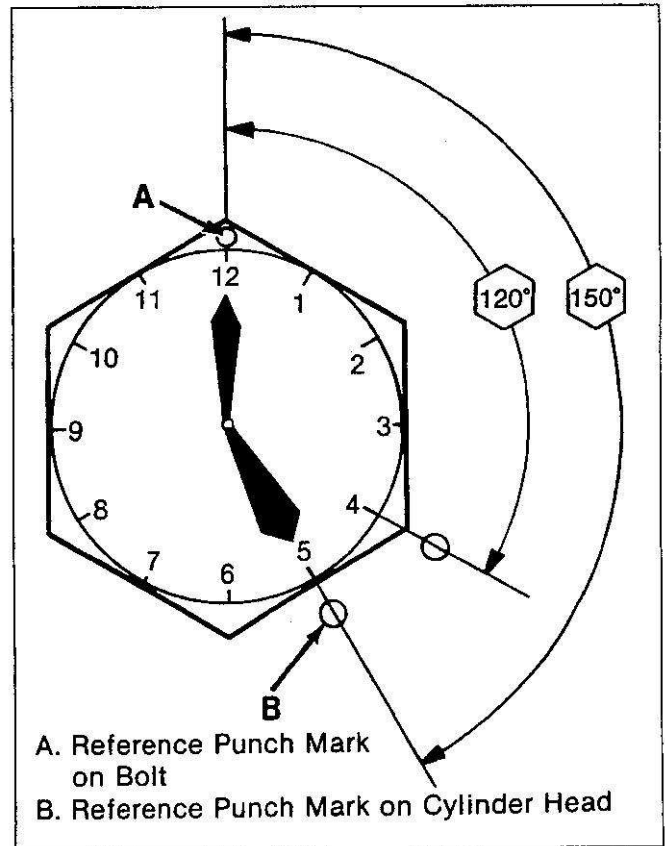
Angle Torquing Method for Cylinder Head Bolts
